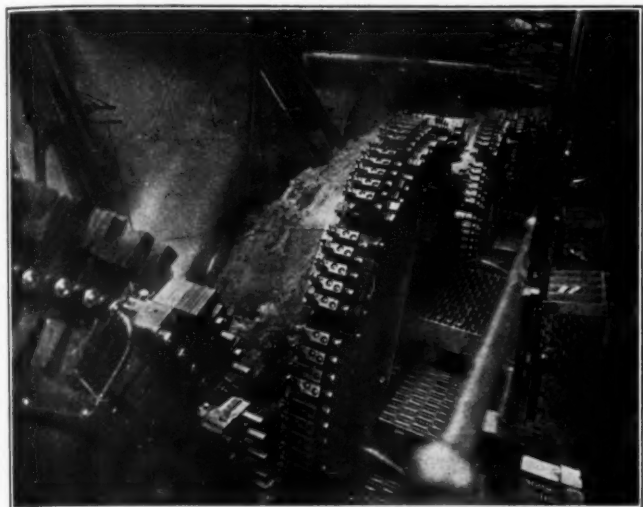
VIEW OF 10-UNIT BRILLO-FIELD MACHINE
